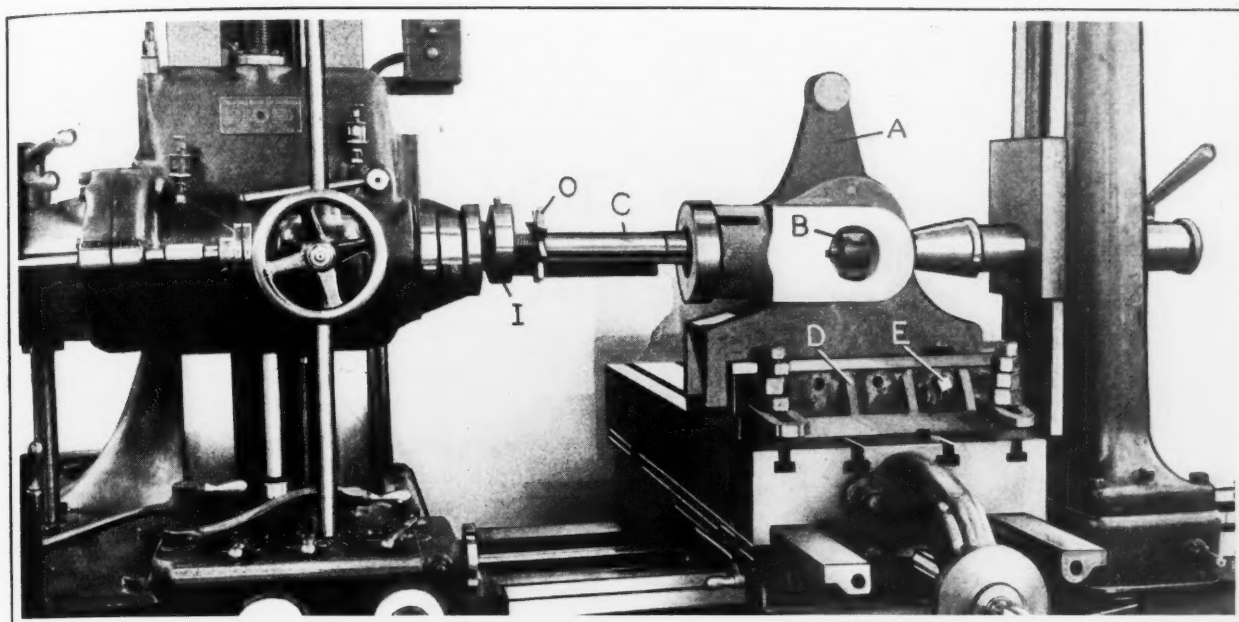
Taper-boring Locomotive Cross-head for Piston-rod Fit
